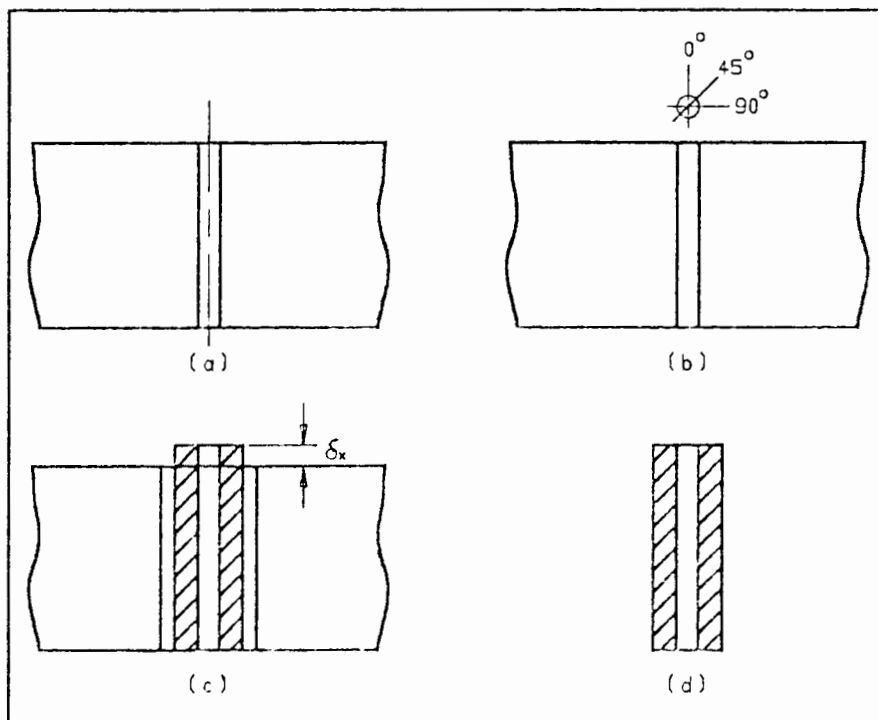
The deep hole drilling technique. A hole of approximately 3.2 mm is drilled through a specimen (a), and its diameter is measured at 0° , 45° and 90° every 2mm of depth (b). A 10mm cylinder with the hole in its centre is then cored out (c). The change in axial length of the cylinder is continuously monitored. After coring the hole is measured as before (d). The three principal stresses can then be calculated from the measurements made.
